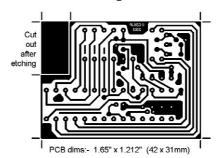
PicAdapter board PCB track and drilling template. NB: This image is reversed
